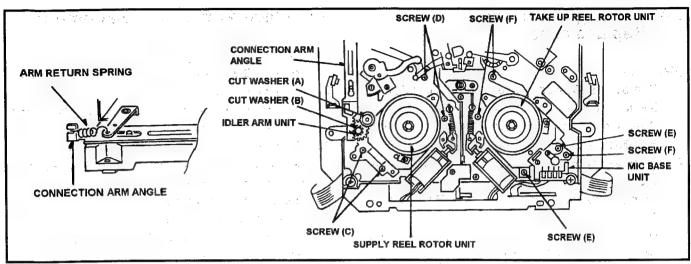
Removal of Supply & Take Reel Rotor Unit
